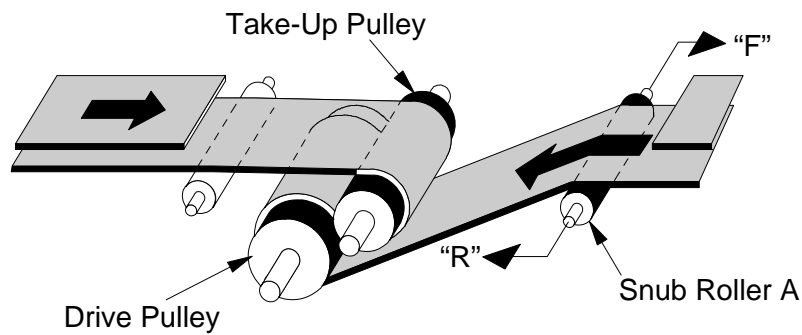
Adjusting the Near Side of the Snub Roller A for Tracking Intermediate Drives
